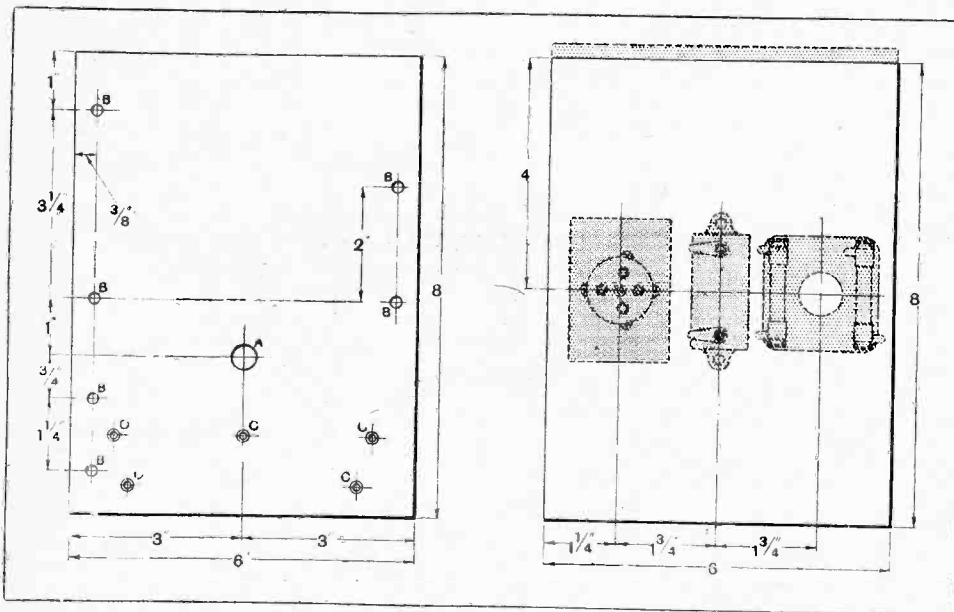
The resistance amplifier. Drilling details of the panel, and (on right) layout of components on the baseboard. A, 1/8 in.; B, 1 B.A. tapped; C, 1/4 in., countersunk for No. 4 wood screws.
